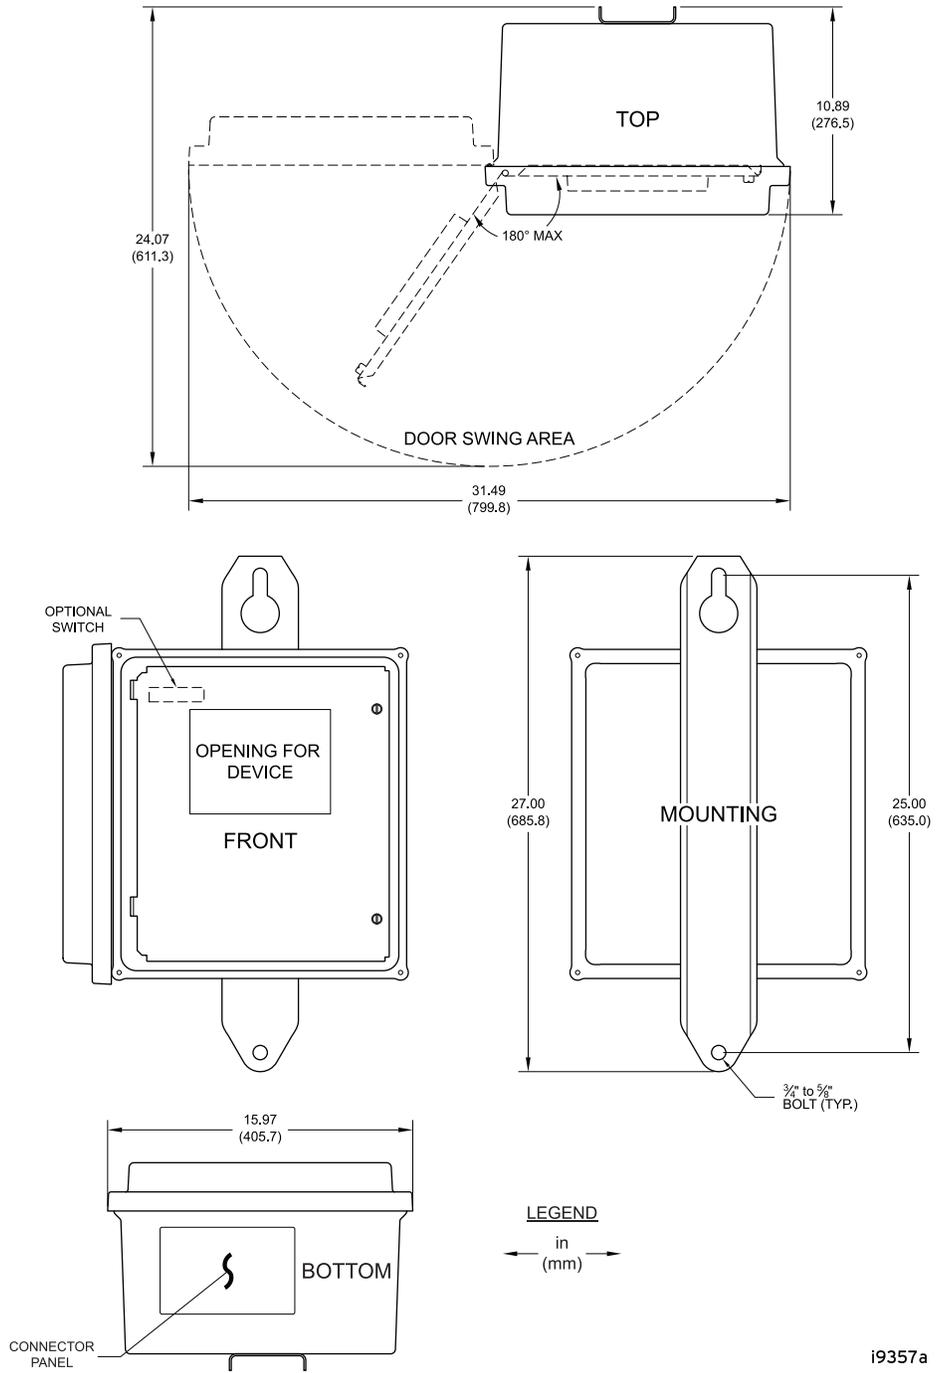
Full-Size Enclosure Mounting Dimensions
